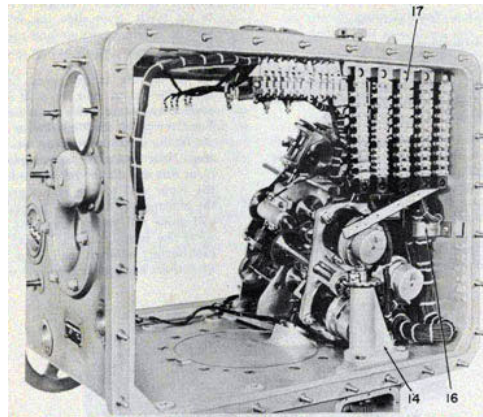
Installing Back Post, Main Cable, and Terminal Blocks.
